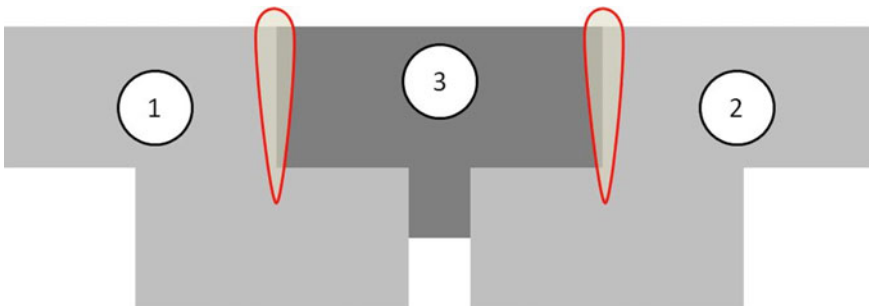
Schematic of the cross section of the welded test ring assembly. The EB welds are highlighted. The three rings are denoted as 1, 2, and 3
